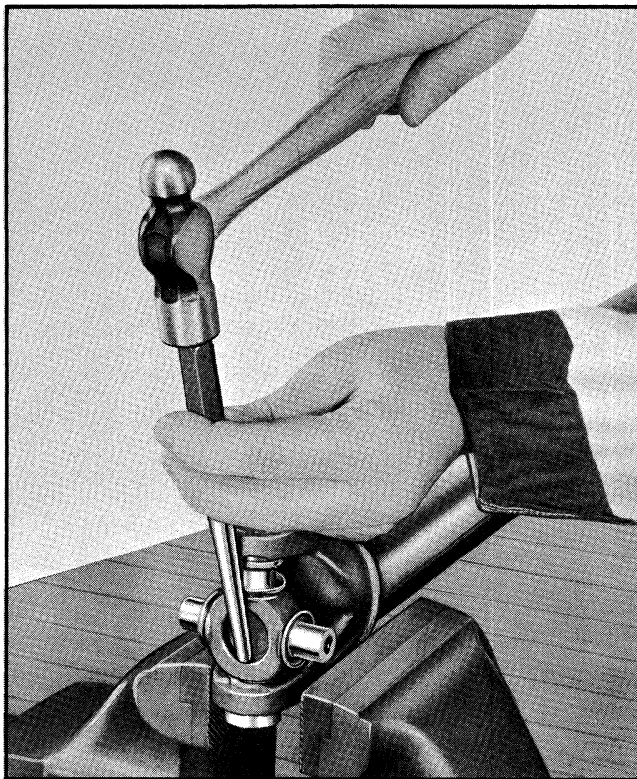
A-6 Removing Bearing From Fixed Yoke Member
